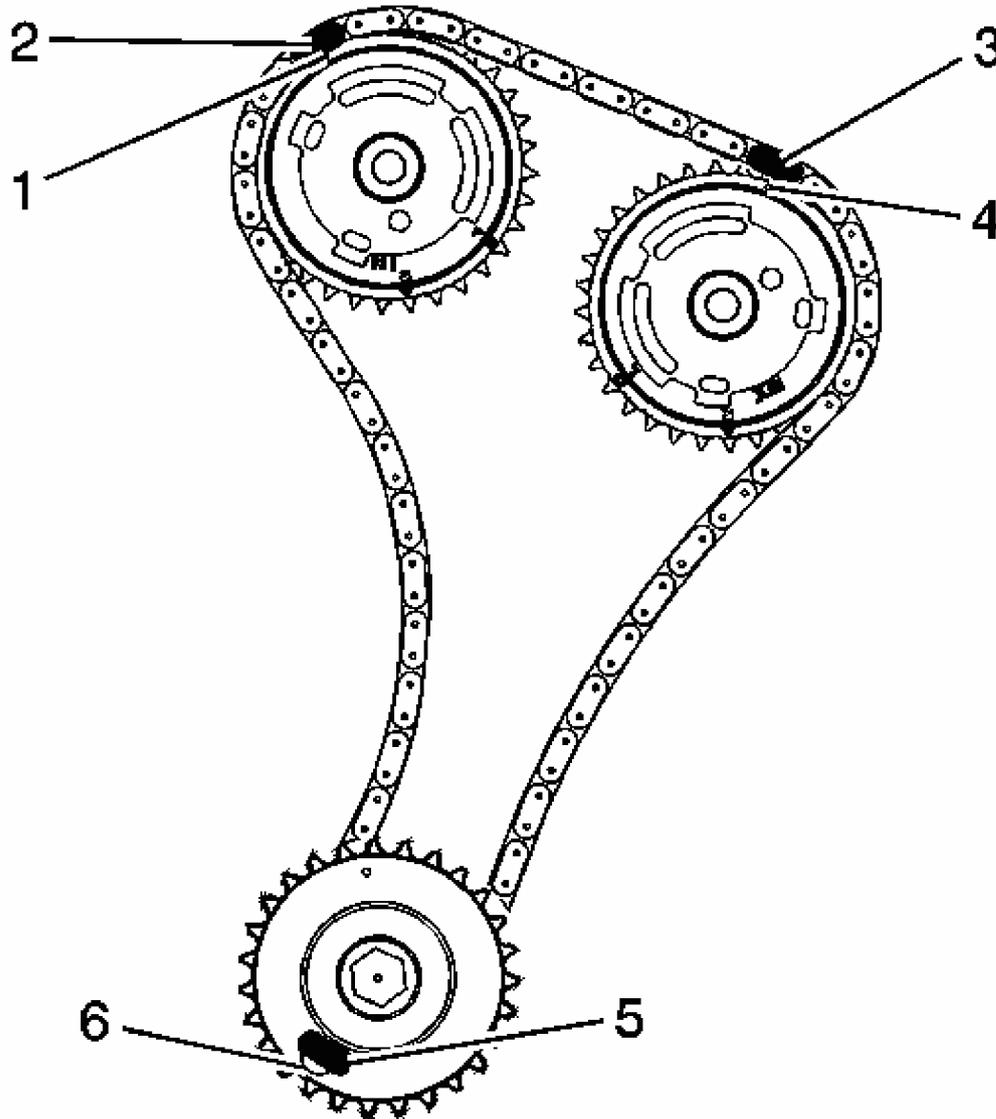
Locating Left Secondary Camshaft Drive Chain Timing Marks
